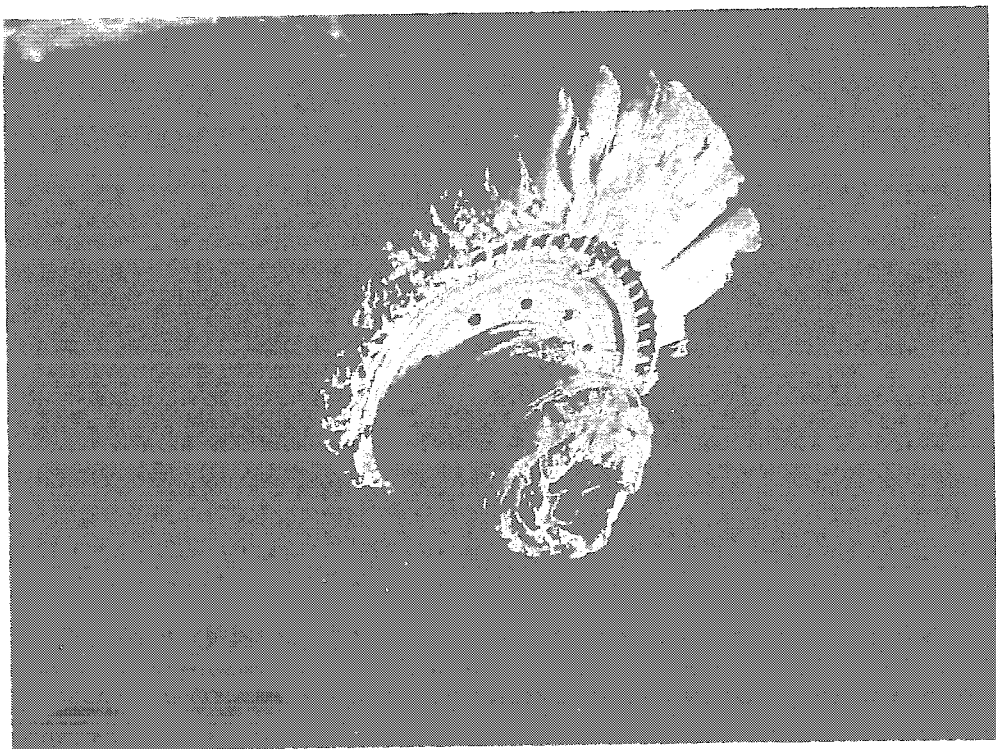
Rear of No 1 engine showing left-hand side of free power turbine casing fractured and holed and right-hand side consumed by fire.
